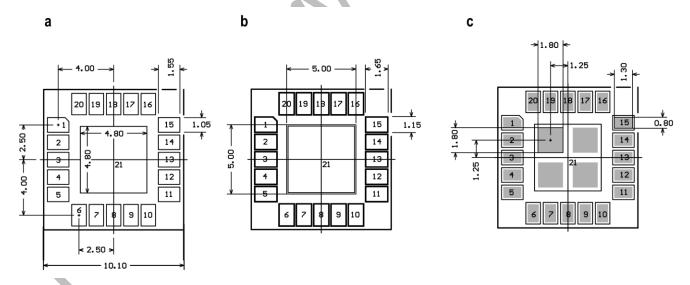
SCD40 Footprint (top view): landing pads (a), soldermask (b) and solderpaste (c).
